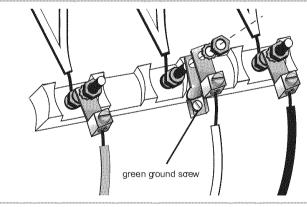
Completed Three Wire Flexible Conduit Connectiog
